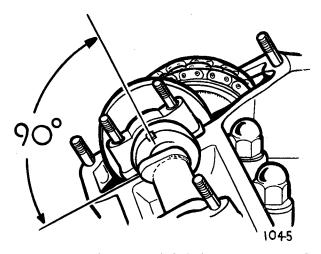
When fitting a camshaft the keyway must be at 90" to the camshaft cover face.
